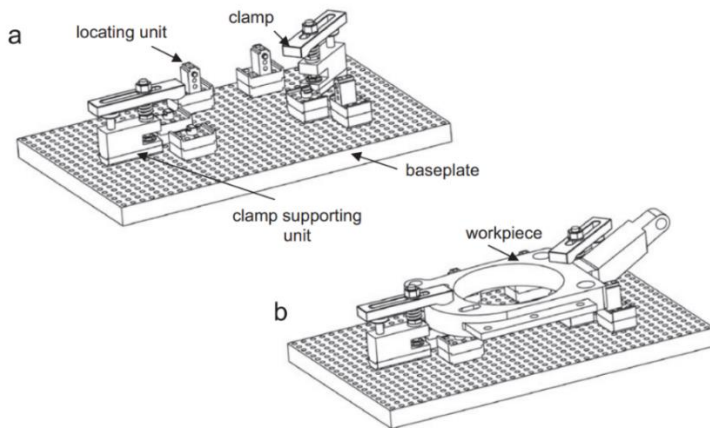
A typical fixture (a) without and (b) with a workpiece [2]
